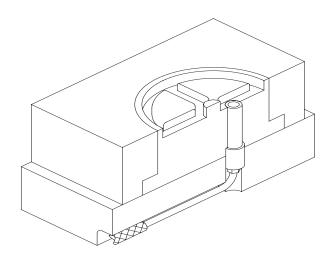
Mounting example: sensor type 6175A2 mounted in mold insert
